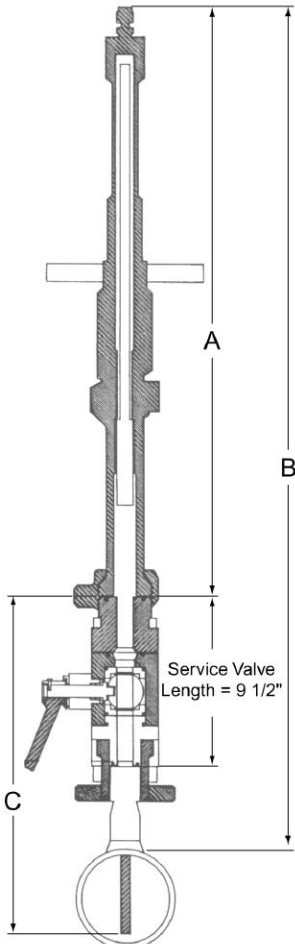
Retrieval Tool / Service Valve Dimensional Schematic
